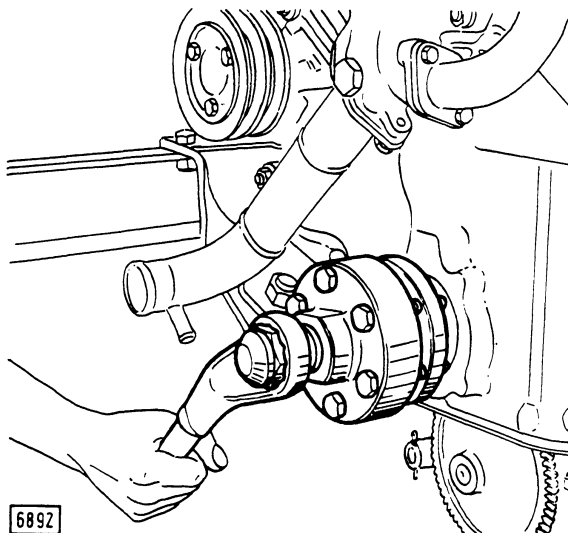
Removing crankshaft vibration damper using puller 75291504.
